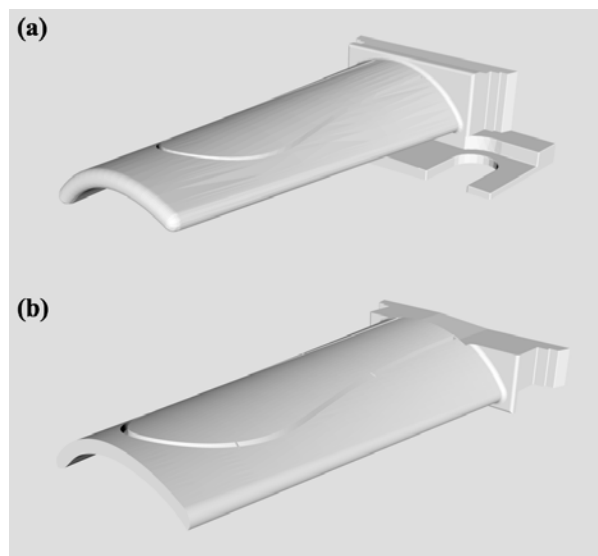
The 3D structure of (a) the printed turbine blade and (b) its resin mold for electroplating.
